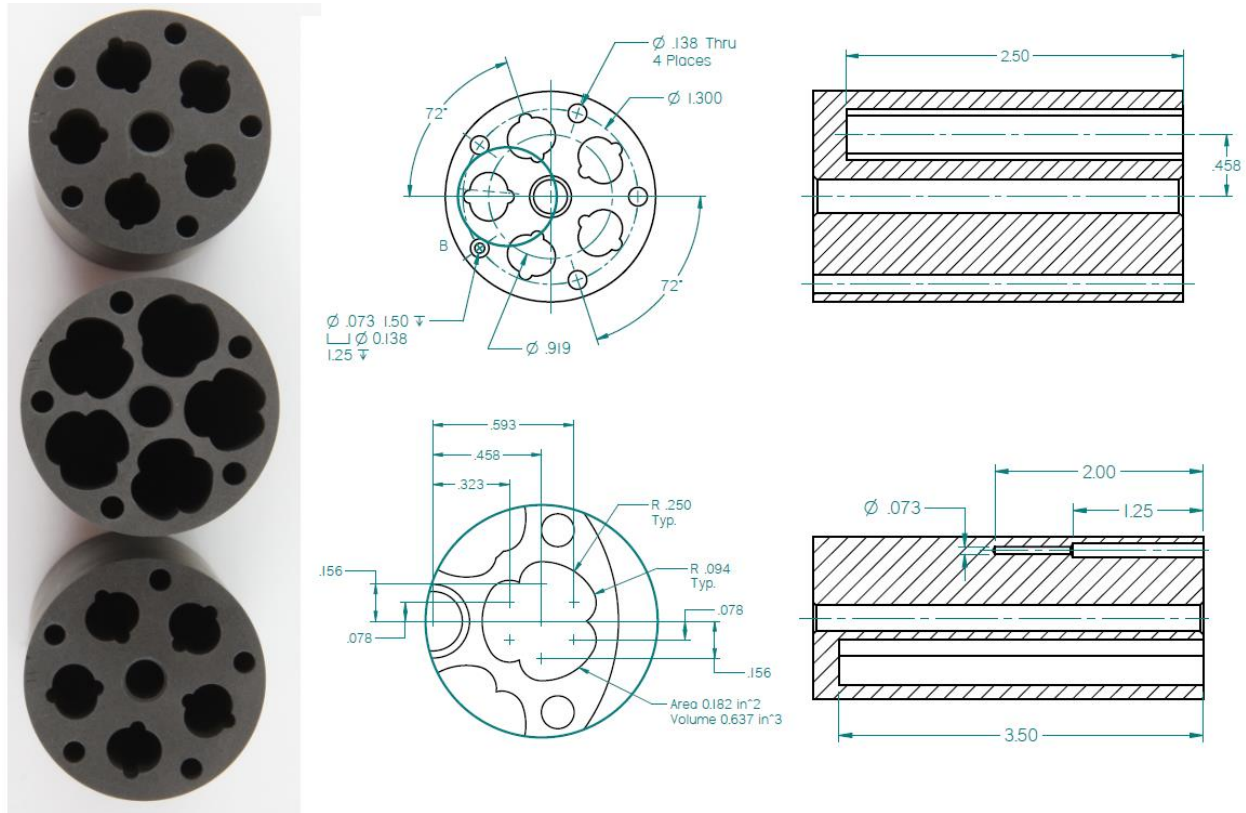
FS-3 Crucibles after fabrication (left), top view drawings (center), and rotated axial cutaway drawings (right). Upper and lower crucibles have identical dimensions.
